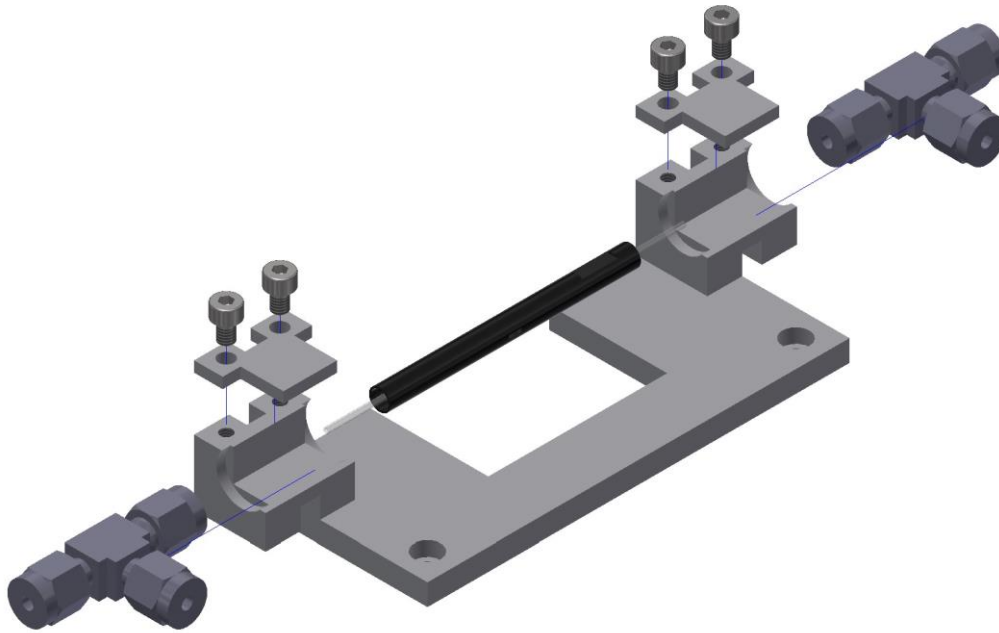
Explosion view of the tube assembly with T-pieces and SiC tube.
